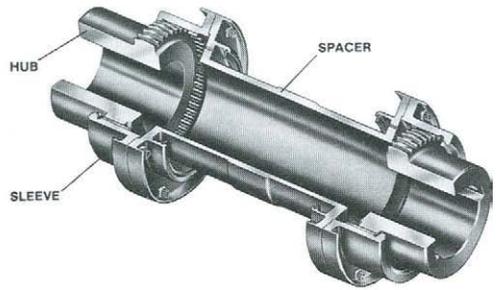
Continuously lubricated gear type coupling with spacer (Courtesy of Zurn Industries)
